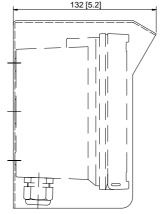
Protective hood (Order No. 1008709) for wall and pipe mounting
